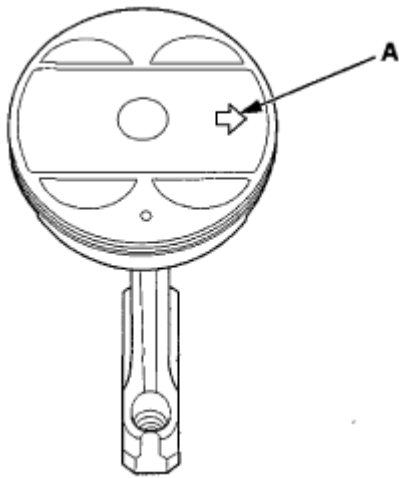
Positioning Piston/Connecting Rod Assembly With Arrow Facing Timing Belt Side Of Engine Block
